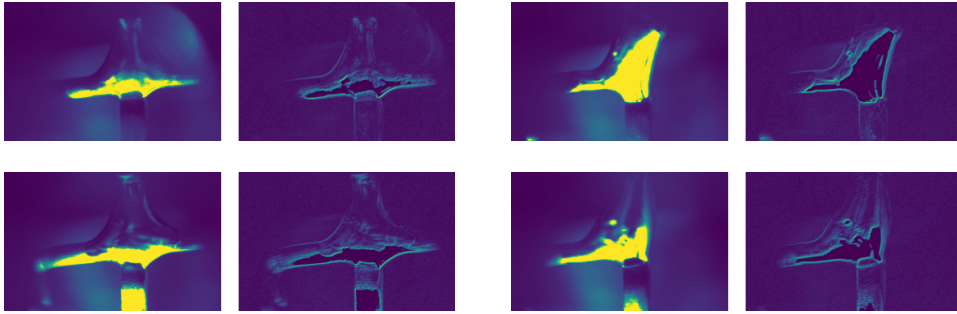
Edges of welding images generated with a sobel filter.
